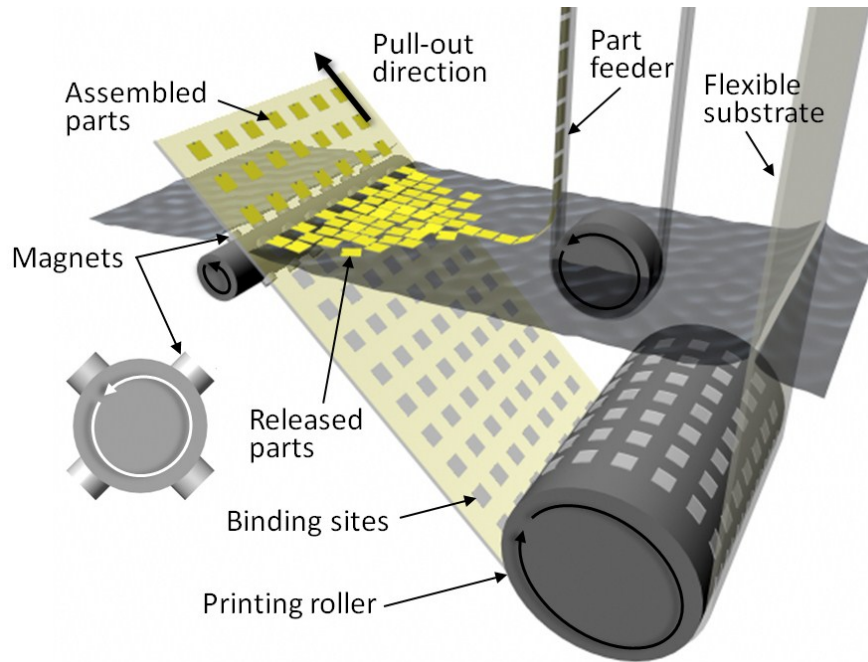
The proposed FSA system can be modified for roll-to-roll process with a flexible substrate. Instead of a magnet template, a roller with magnets attached attracts and assembles the released parts.
